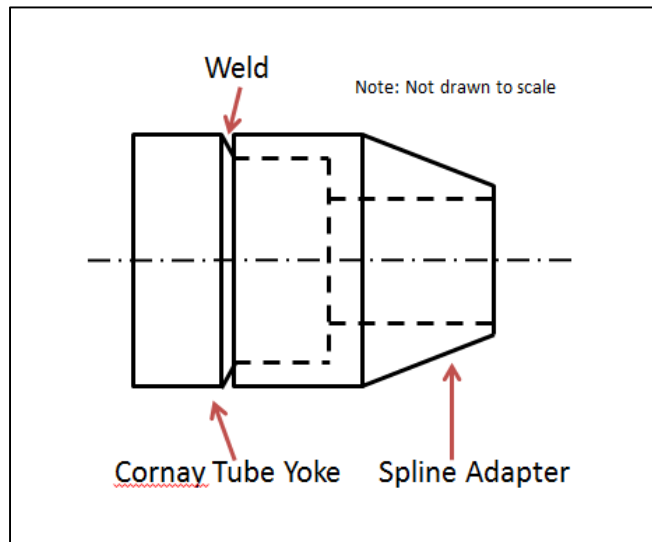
Tube Yoke to Spline Adapter Weld
